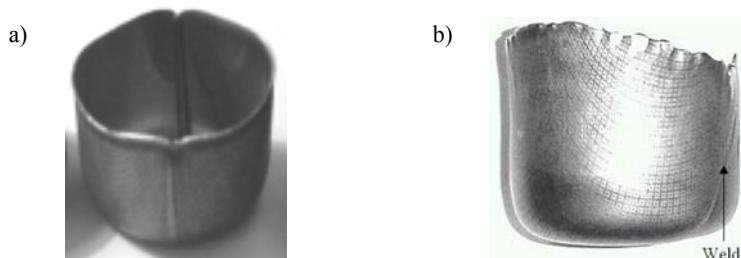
Cylindrical cups drawn from tailor-welded blanks: a) 1.2 mm + 1.2 mm, b) 0.8 mm + 1.2 mm
